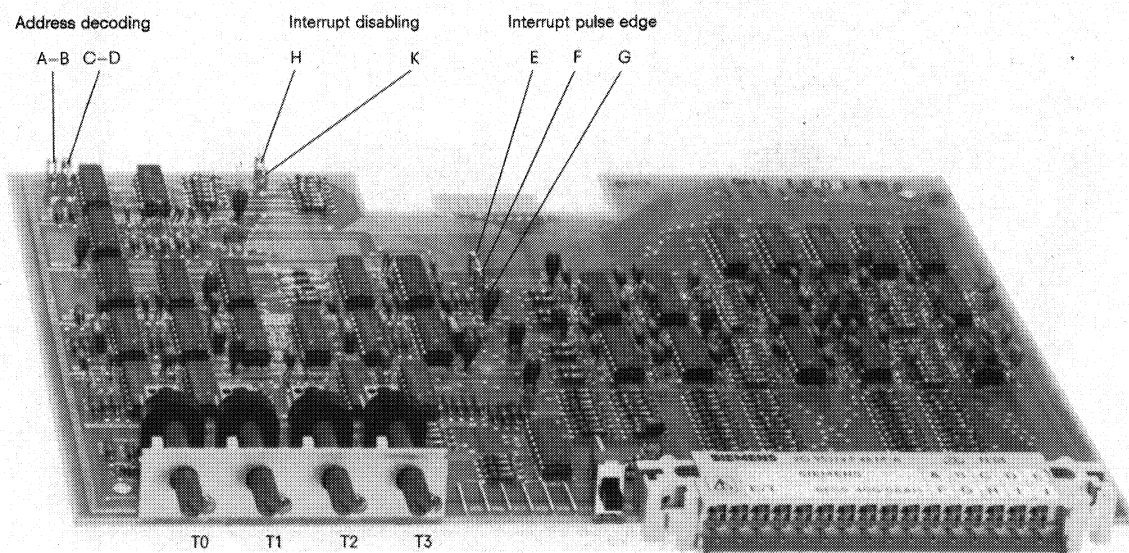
Jumper assignment and positions of the DIL switches on the input/timer module
